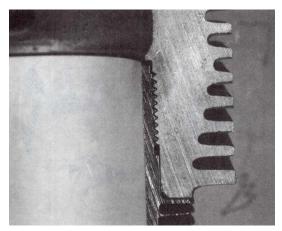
Continental 0-200 cylinder. Steel barrel is screwed into aluminum head. This design is used on all Continental and Lycoming cylinders.
